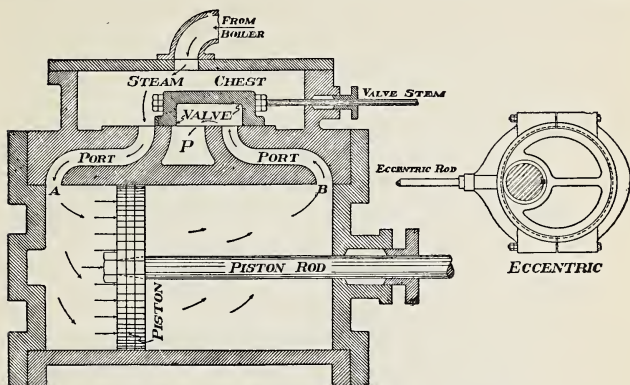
Showing the interior of the cylinder of a steam-engine. Steam entering port A, piston moving to the right.
